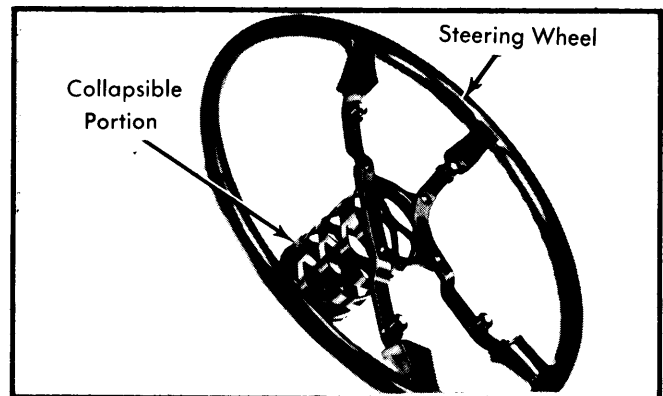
Typical Volkswagen Steering Wheel Assembly
